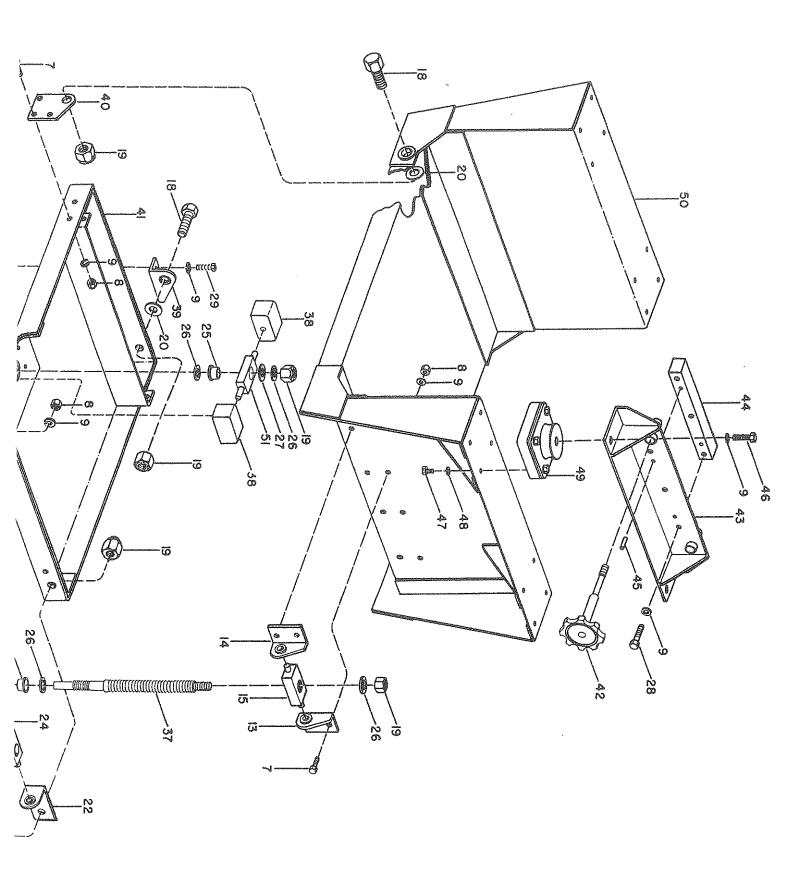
Direction Finder Set Support MT-1283/PRD-1, exploded view.
